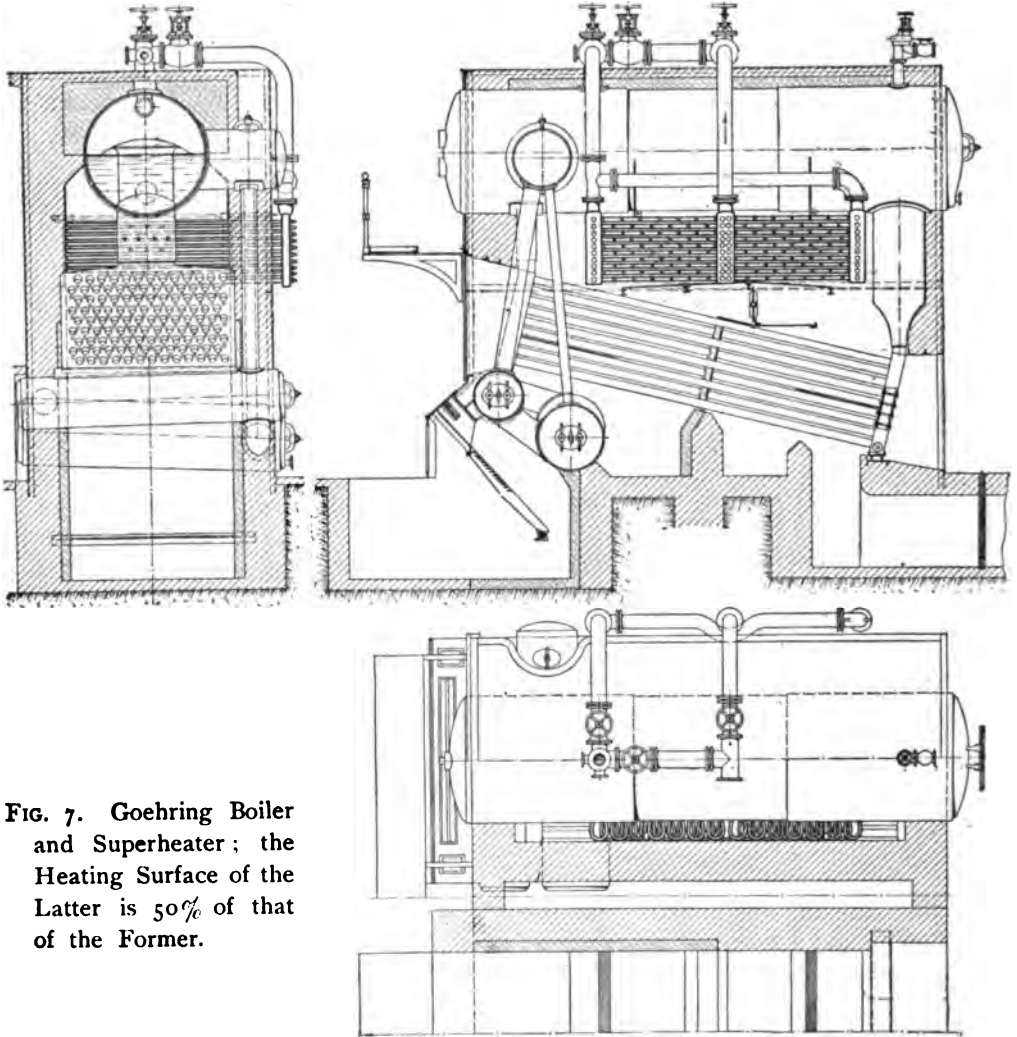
Goehring Boiler and Superheater; the Heating Surface of the Latter is 50% of that of the Former.
